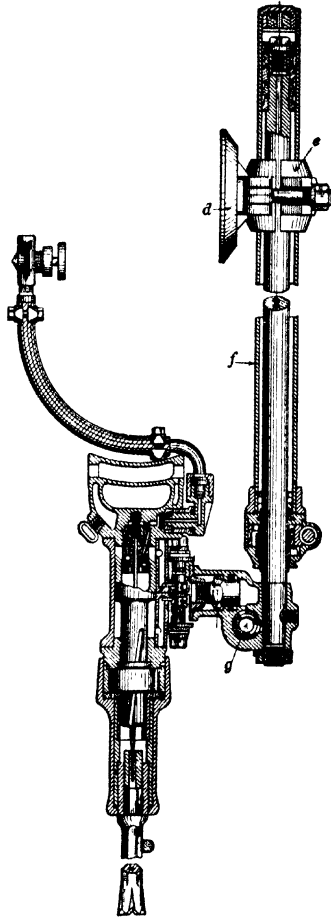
Pneumatic-feed Mounting for Sullivan "Rotators."
